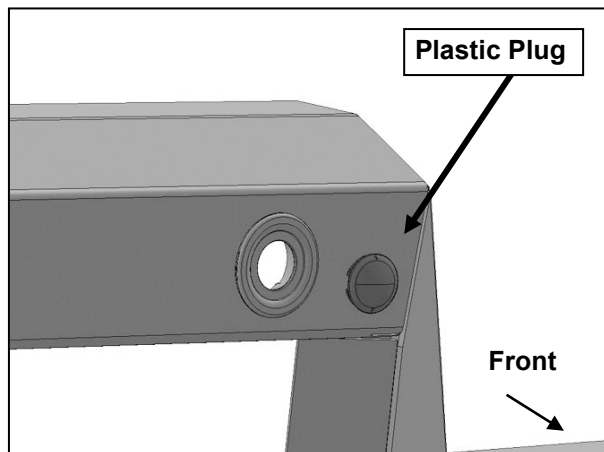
Reattach the factory bumper support bracket to the back of the factory bumper. Passenger/right side pictured
